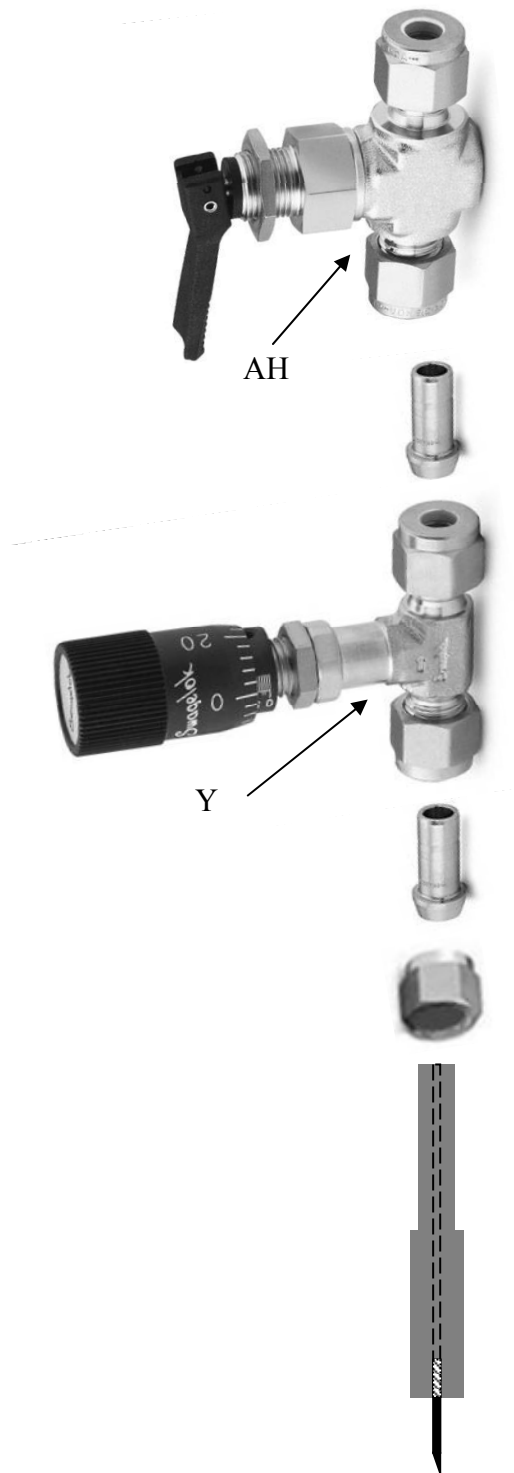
Exploded View of Intermediate Water System (Swagelok Caps Removed From Port Connectors and Placed on Valves to Show Relationship).
